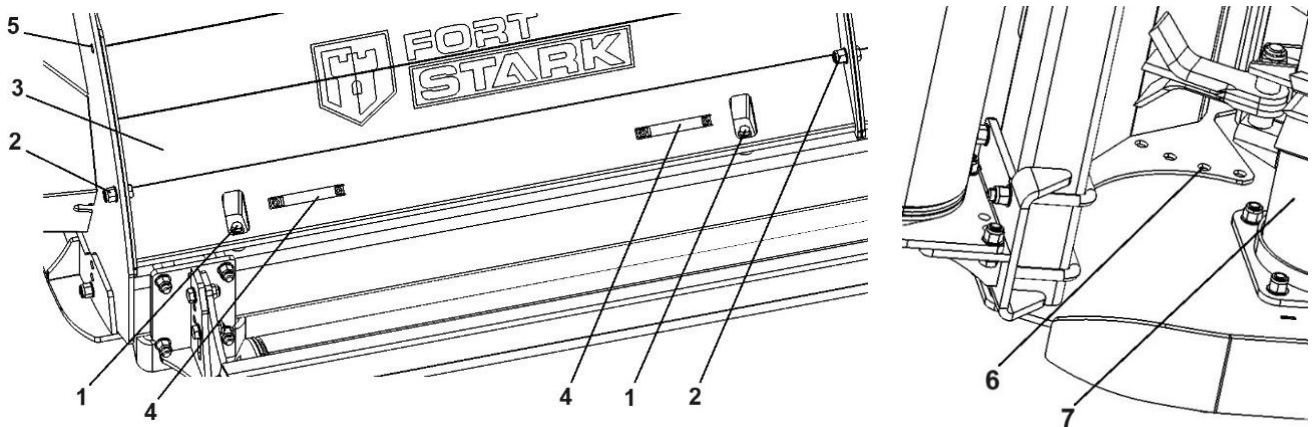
Opening the rear flaps: 1 – fastening bolts, 2 – bolts with nuts, 3 – rear flap, 4 – handles, 5 – hole in the side guard, 6 – adjustment holes, 7 – working shaft with cutting blades
